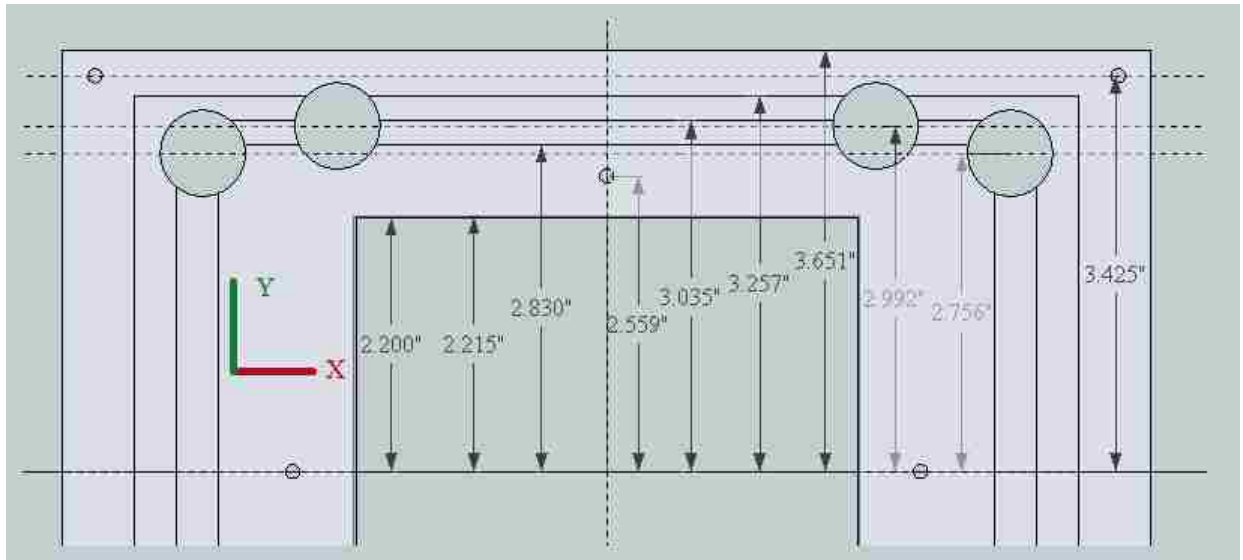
Top view of the 10x10 cm² upper trimmer lead plate illustrating the in-plane dimensions.
